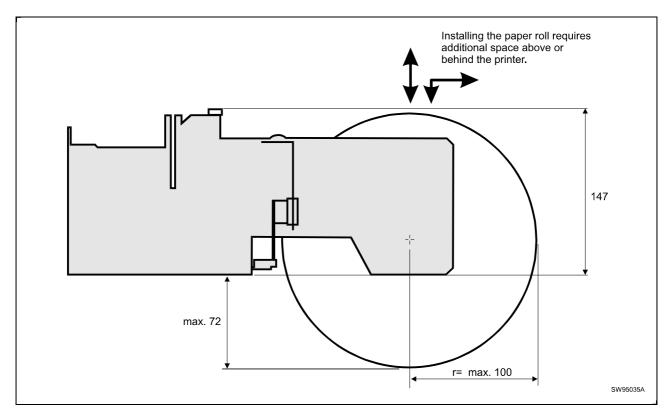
Top view. TTP 52XX models equipped with the optional paper roll holder for up to 200 mm roll diameter.
